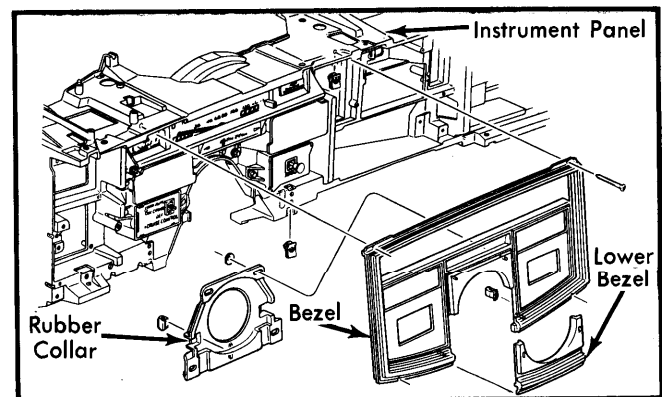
Speedometer Cluster Removal (Eldorado and Seville)
